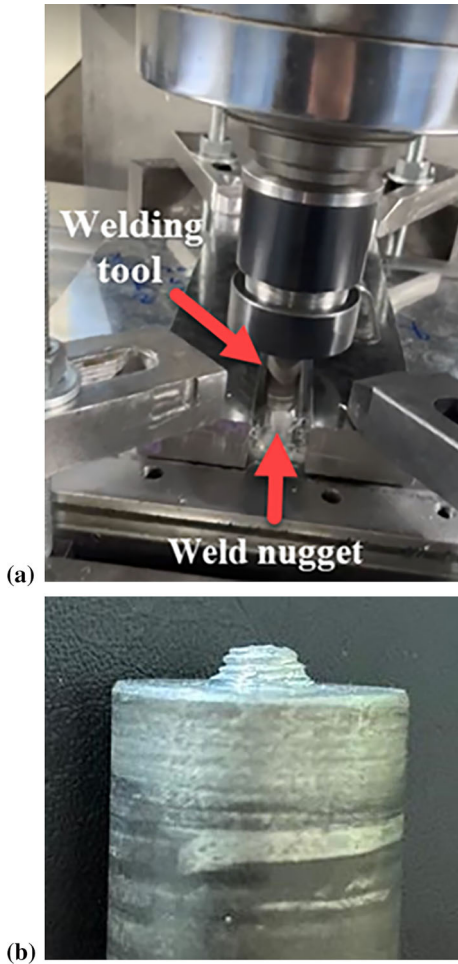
(a) Performance of the welding process, (b) Picture of the tool after the process was performed
